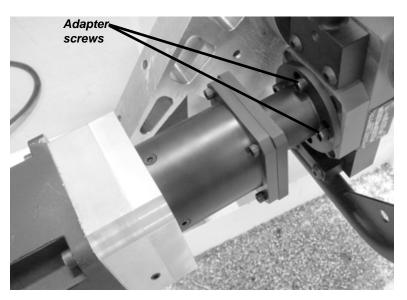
Install the drive on the EP 424 drive mount and secure it with the adapter screws.
